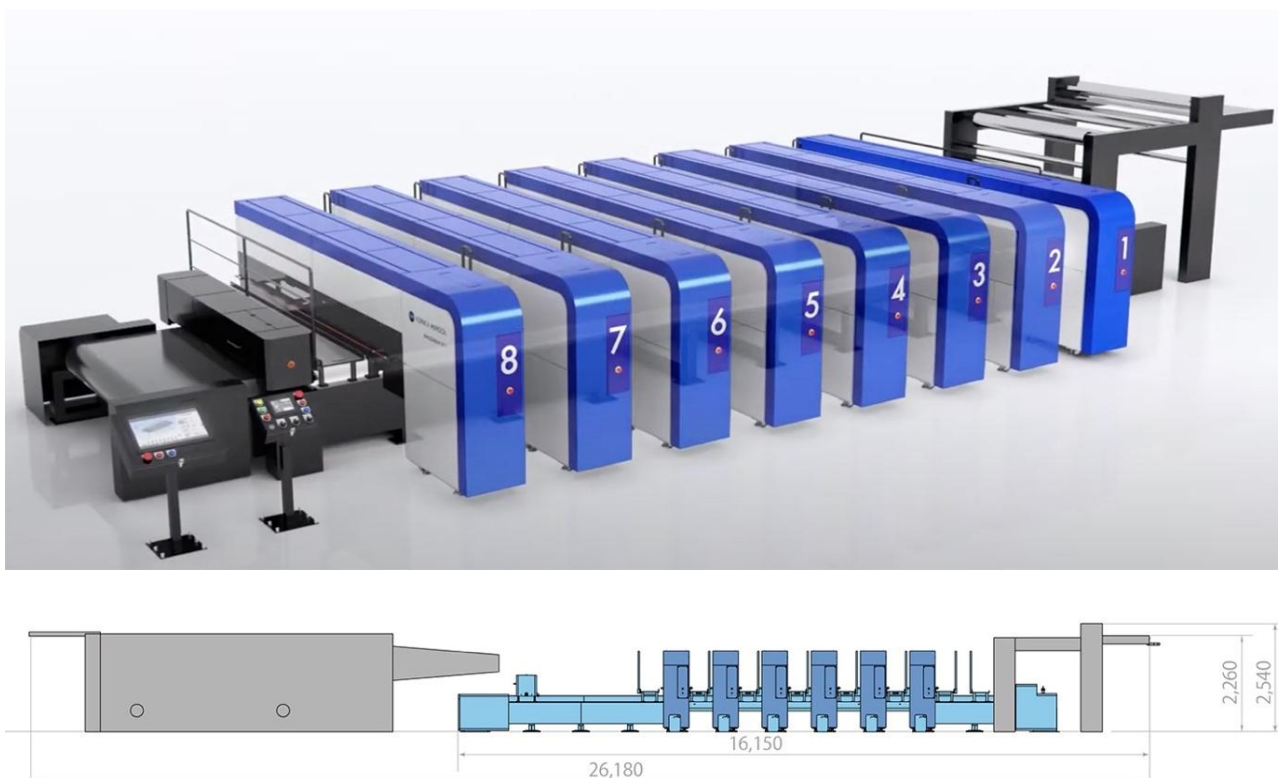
Single-pass construction of the Konica Minolta Nassenger SP-1 inkjet textile printing machine: a) photography of a typical configuration; b) a schematic view with dimensions [6]
